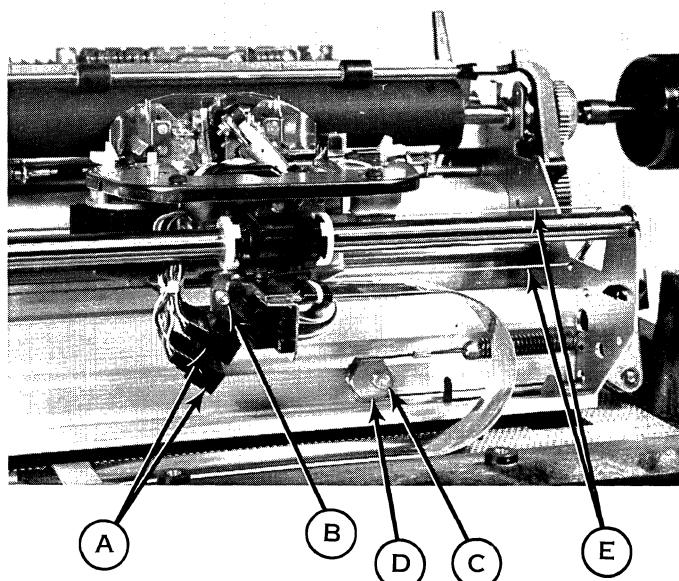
CARRIAGE ELECTRICAL CABLE ASSEMBLY & SNUBBER
